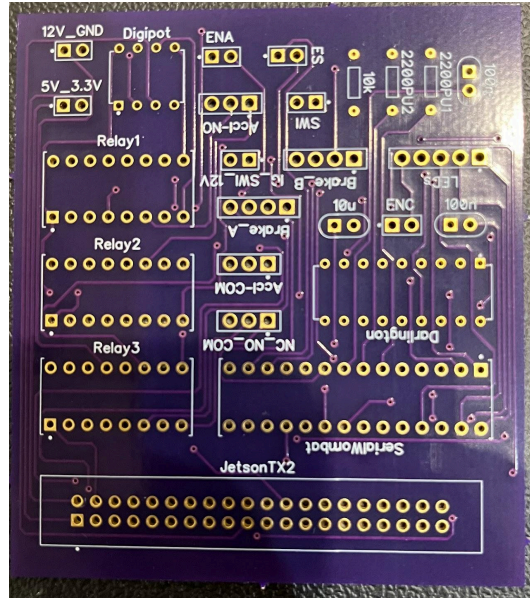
PCB design, with pinouts for the Serial Wombat and the Jetson TX2
